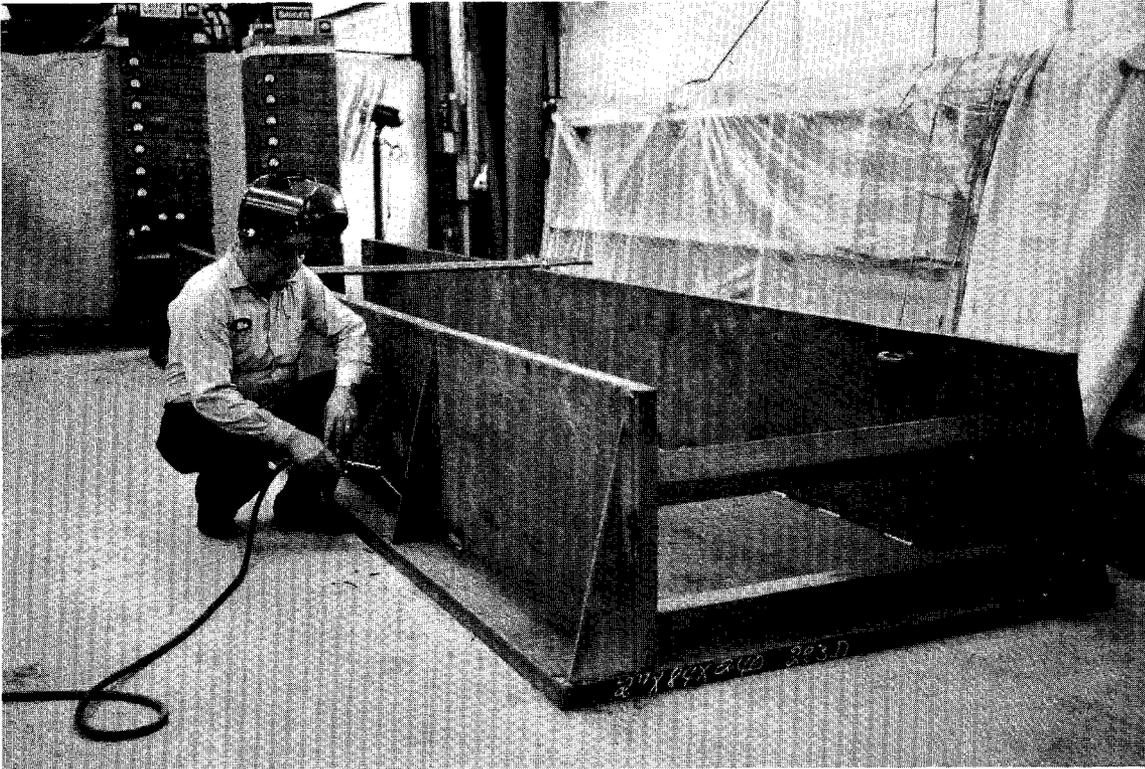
Glenn Smith of the Machine Shop welding the prototype target vacuum box.
